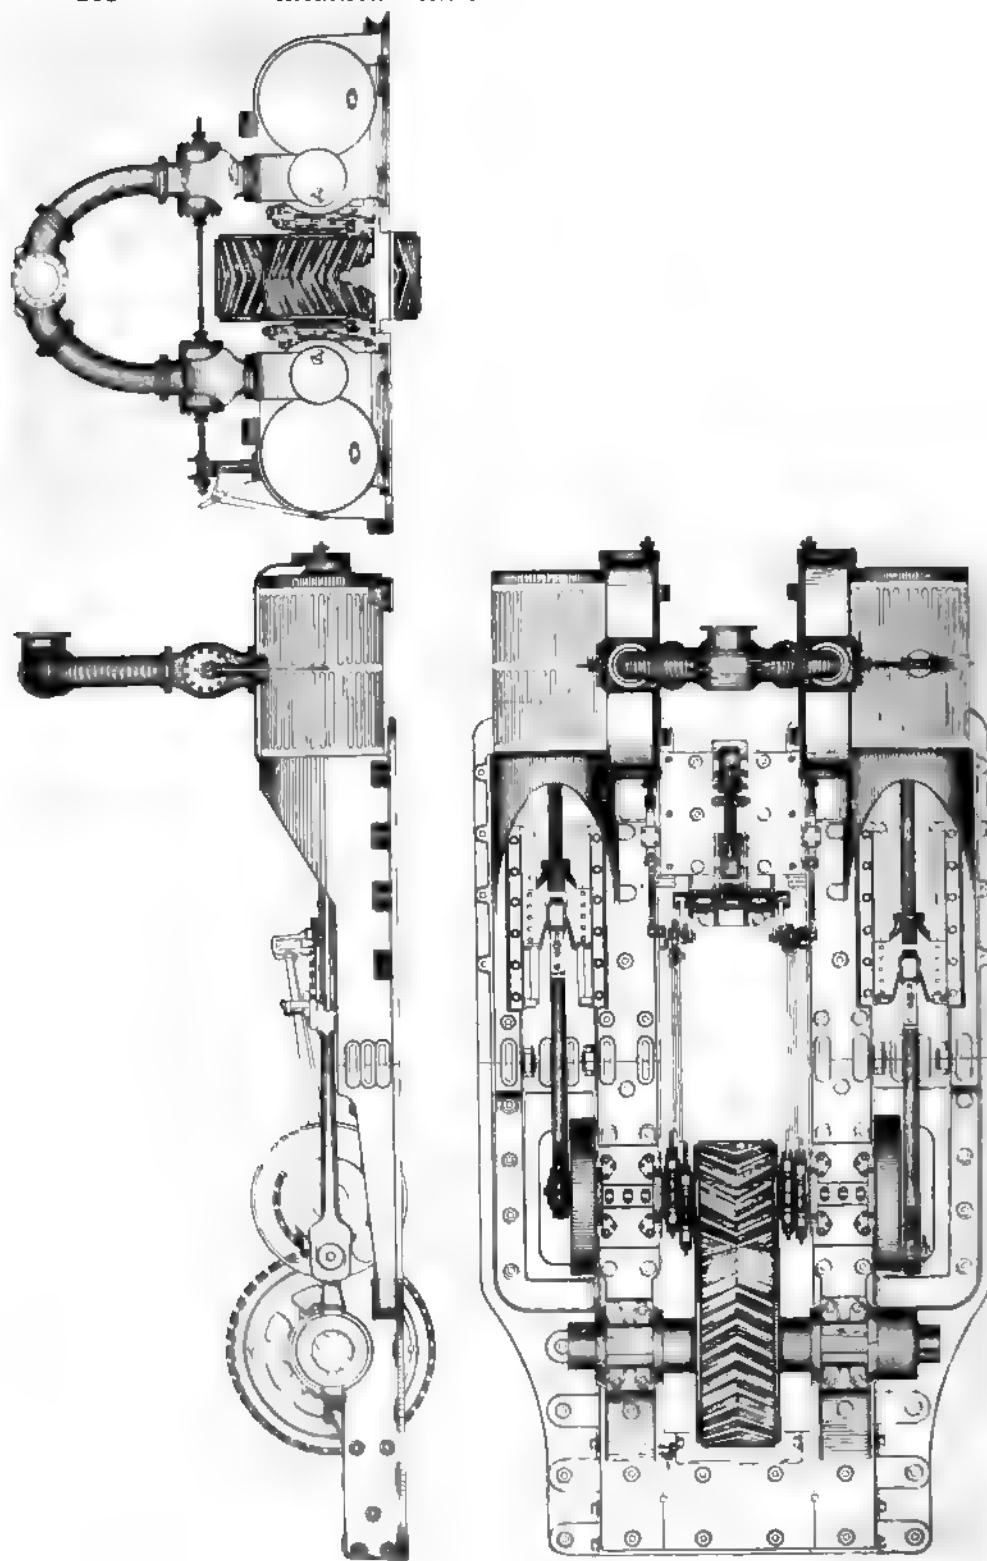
DIFFERENTIALLY-GEARBD REVERSING ENGINE
